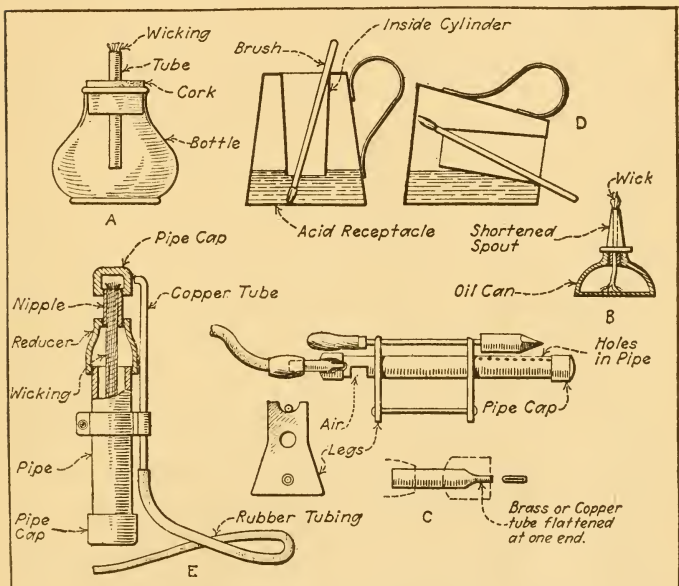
Alcohol Lamps, Acid Receptacle, Blow Torch and Soldering Iron Heater May All Be Made in the Home Workshop.
